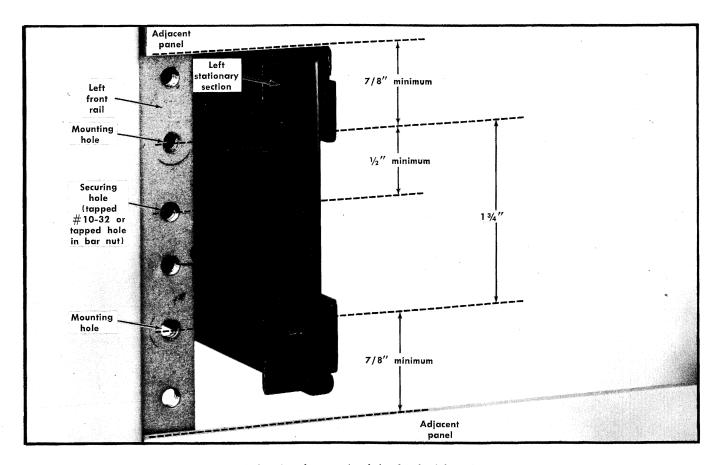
Locating the mounting holes for the left stationary section. Same dimensions apply to the right stationary section.
